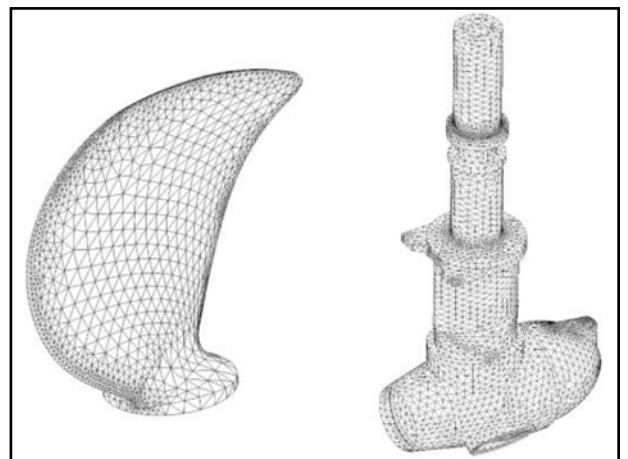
Finite-element model of the propeller blade (left) and the thruster housing (right).
